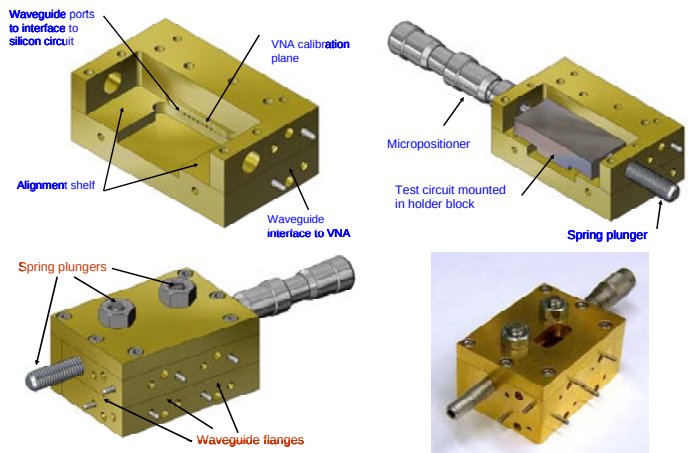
Schematic of the test fixture used to measure the silicon micromachined components. A photograph of the machined test fixture is shown on the bottom right.
